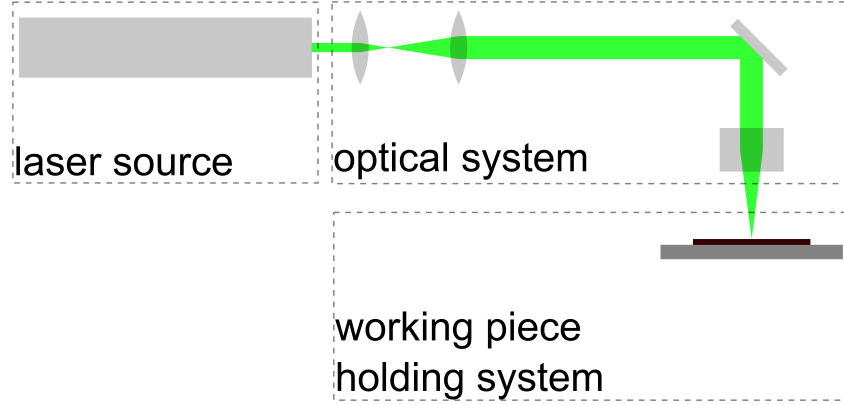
Scheme of a typical laser processing machine. The machine's main sections are: the laser source, the optical system, and the working piece-holding stage. For precise positioning of the laser beam, a movable holding stage fixes the working piece during the processing.
